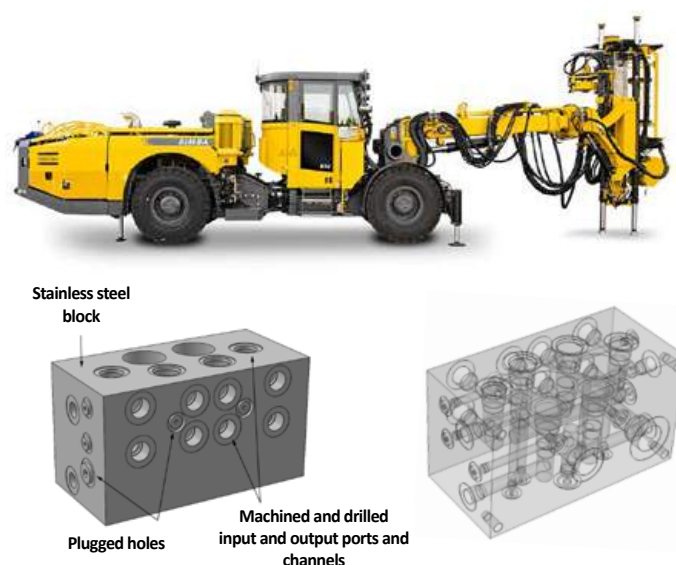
Top, an Atlas Copco underground drilling rig and bottom, the company's original manifold block design
